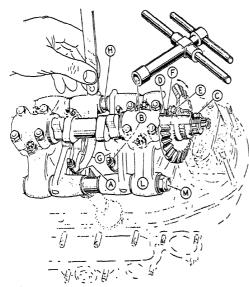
PART VIEW OF ROCKERS AND CAMSHAFT.
